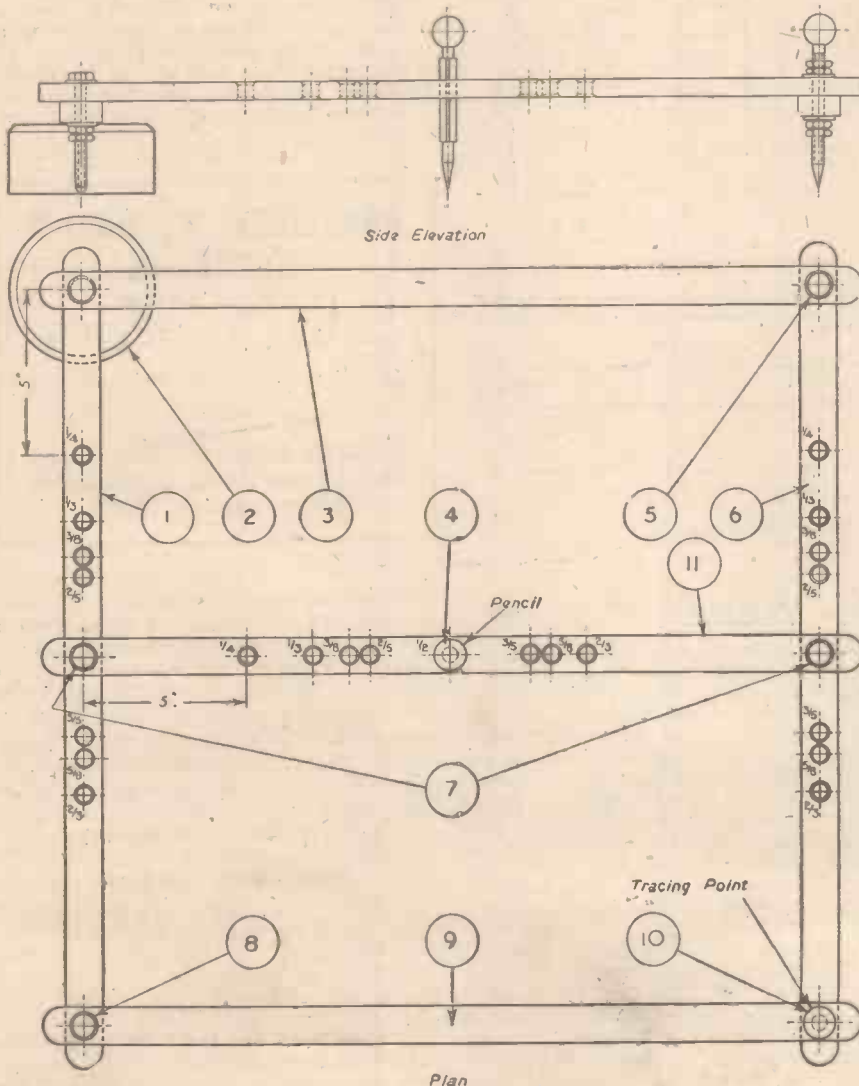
Side elevation and plan of the finished pantograph, showing numbered details.
